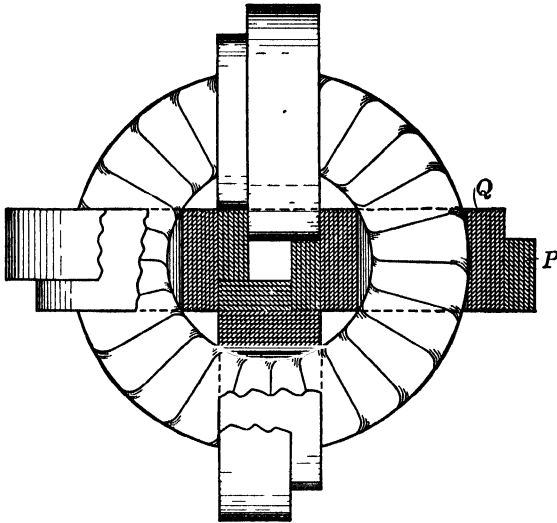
Core sections, Spirakore transformer with distributed core. (General Electric Co)
